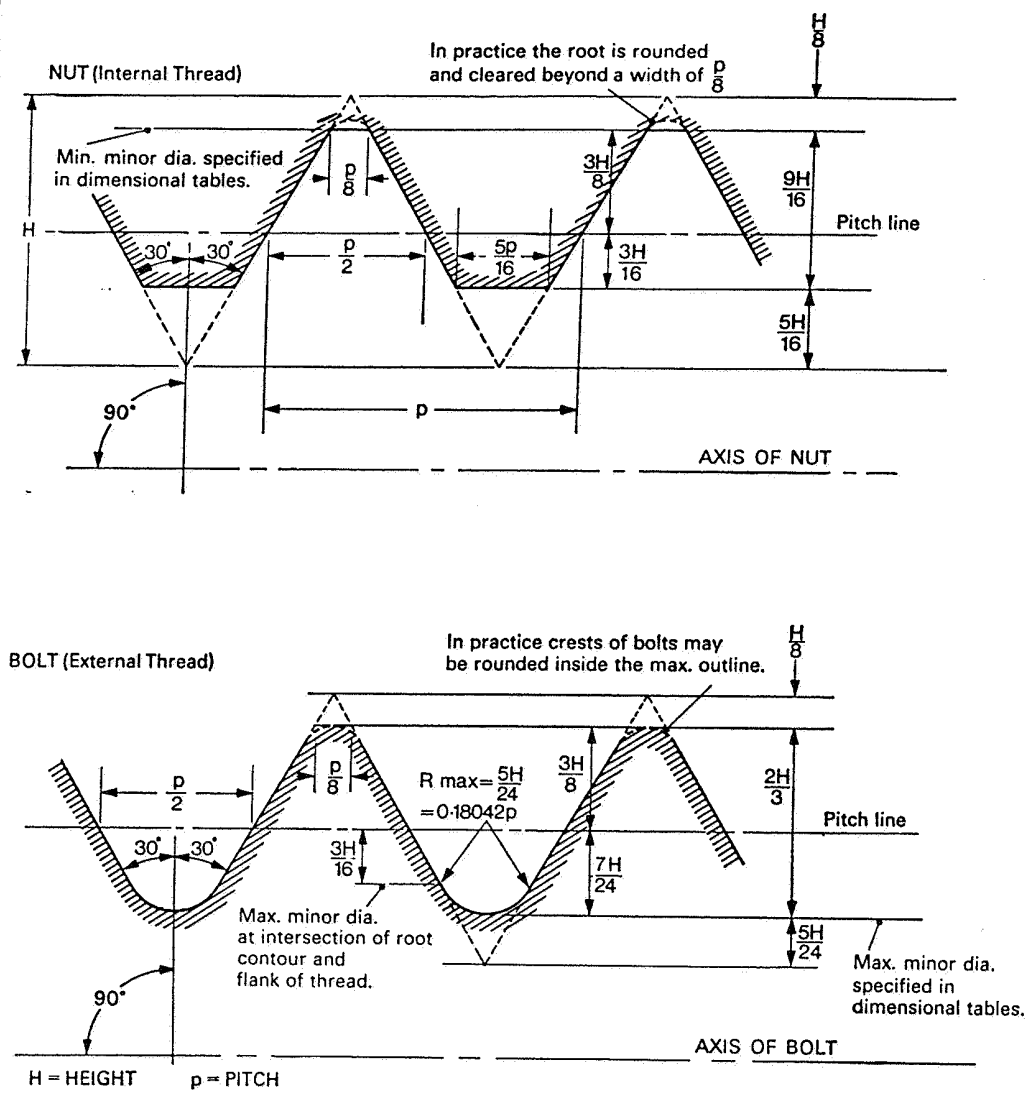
DESIGN FORMS OF UNJ THREAD (MAXIMUM METAL CONDITION)
